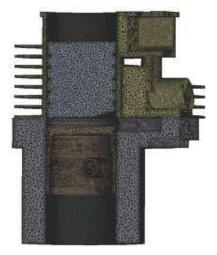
shows the Configuration of the assembly with cu coating piston, liner and cylinder head and showing different materials in various zones
